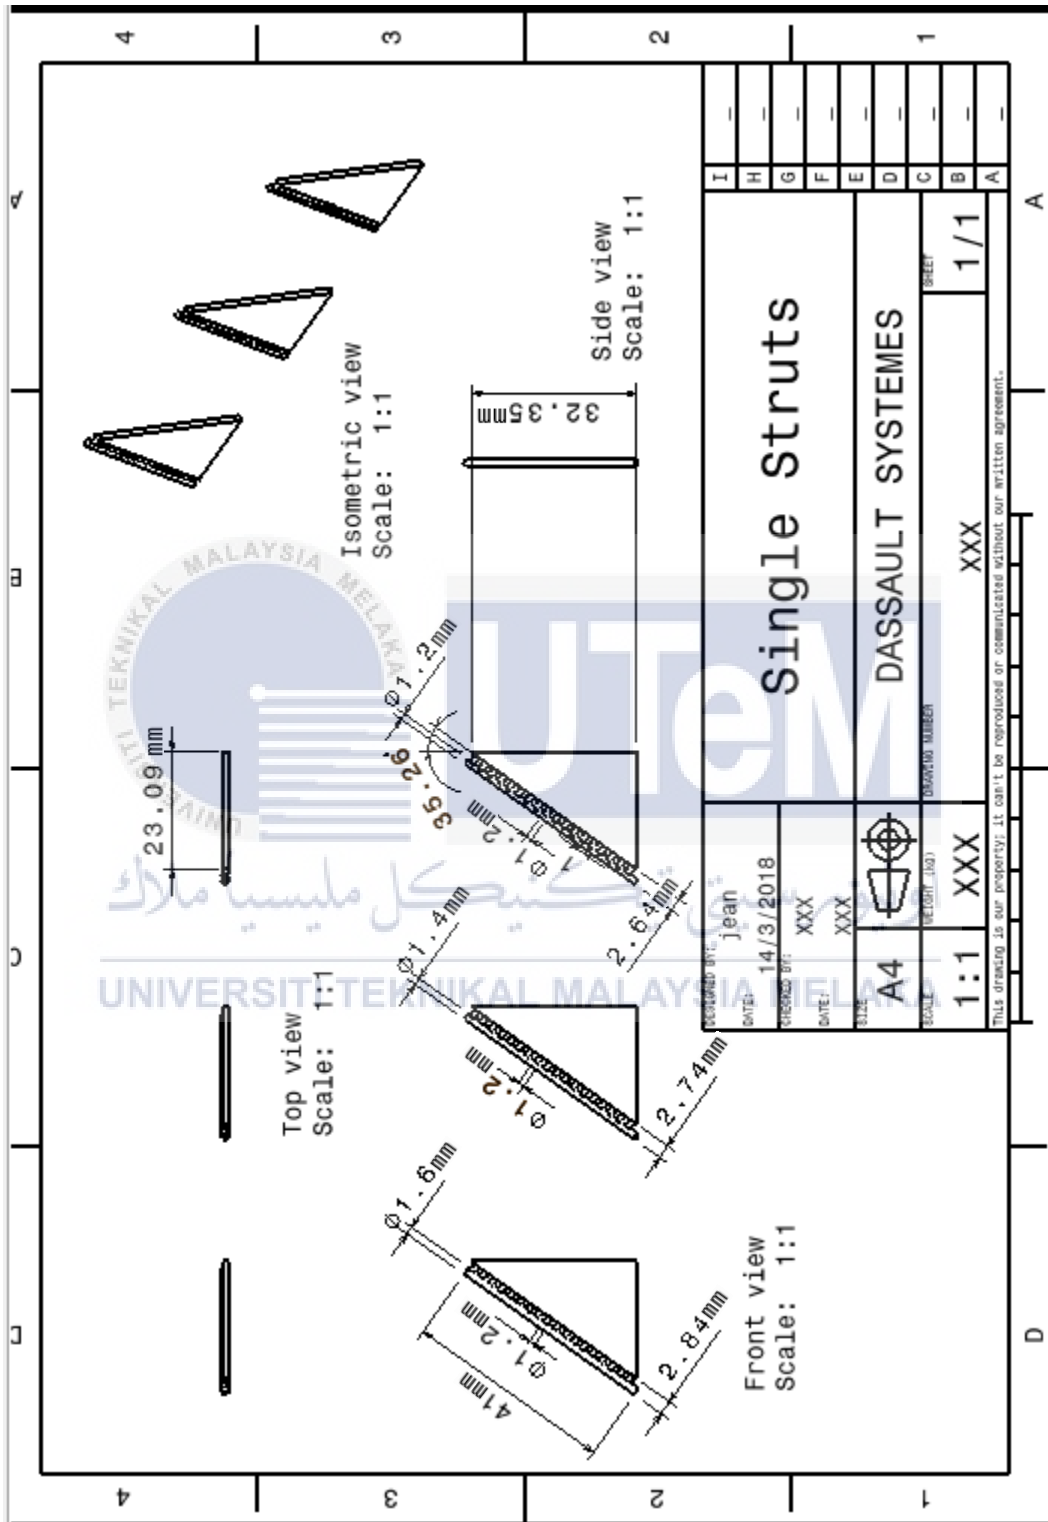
The dimension drawing of single struts with 35.26° using CATIA.
